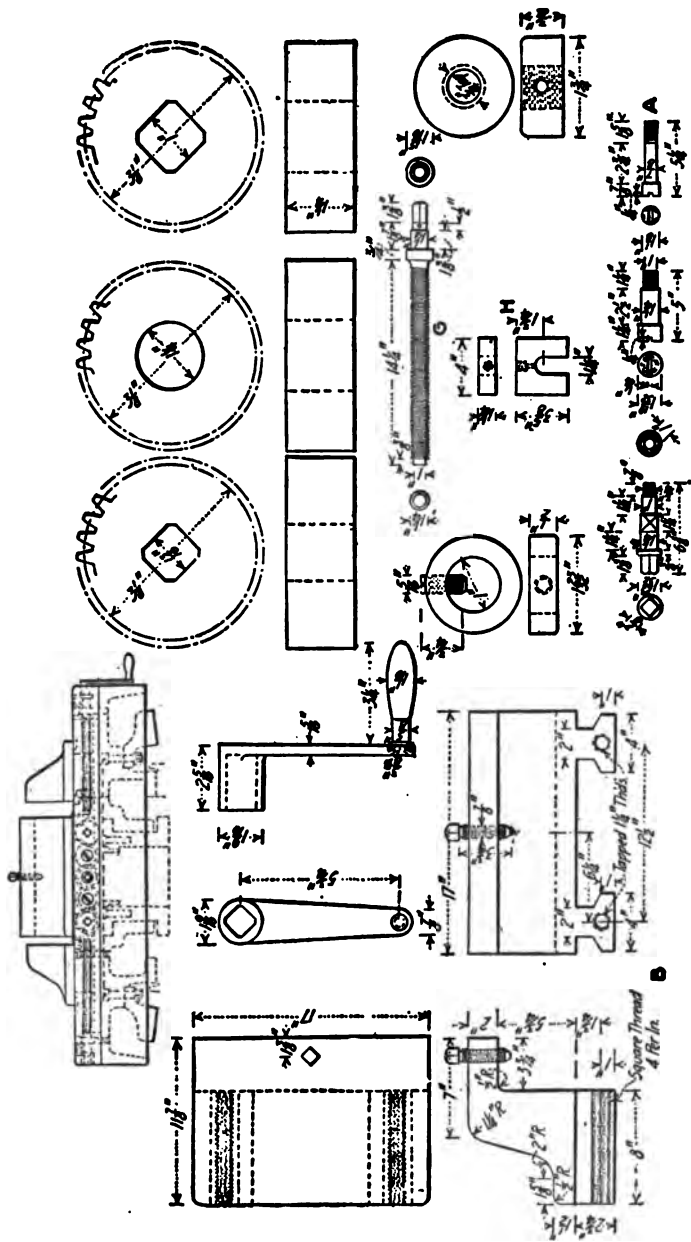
DETAILS OF DRIVING BOX CHUCK
